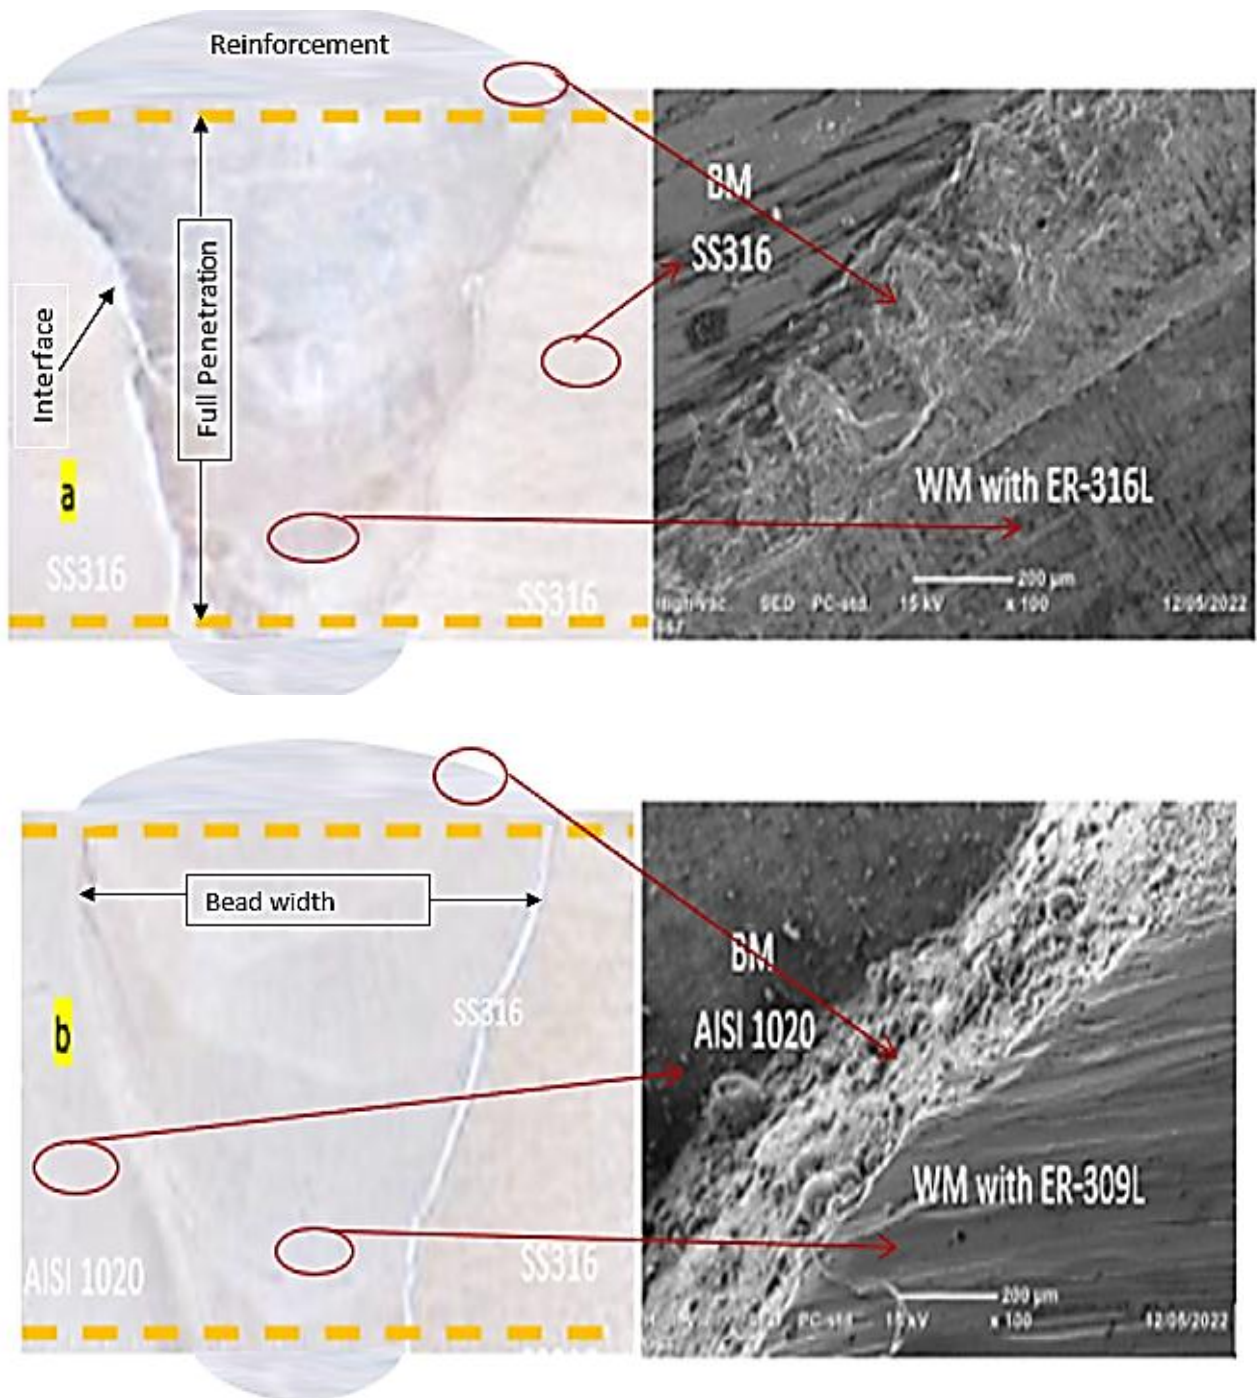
Cross-section of Weld bead and penetration of similar and dissimilar welded metals specimens; a) welded with ER-316, b) welded with ER-309
